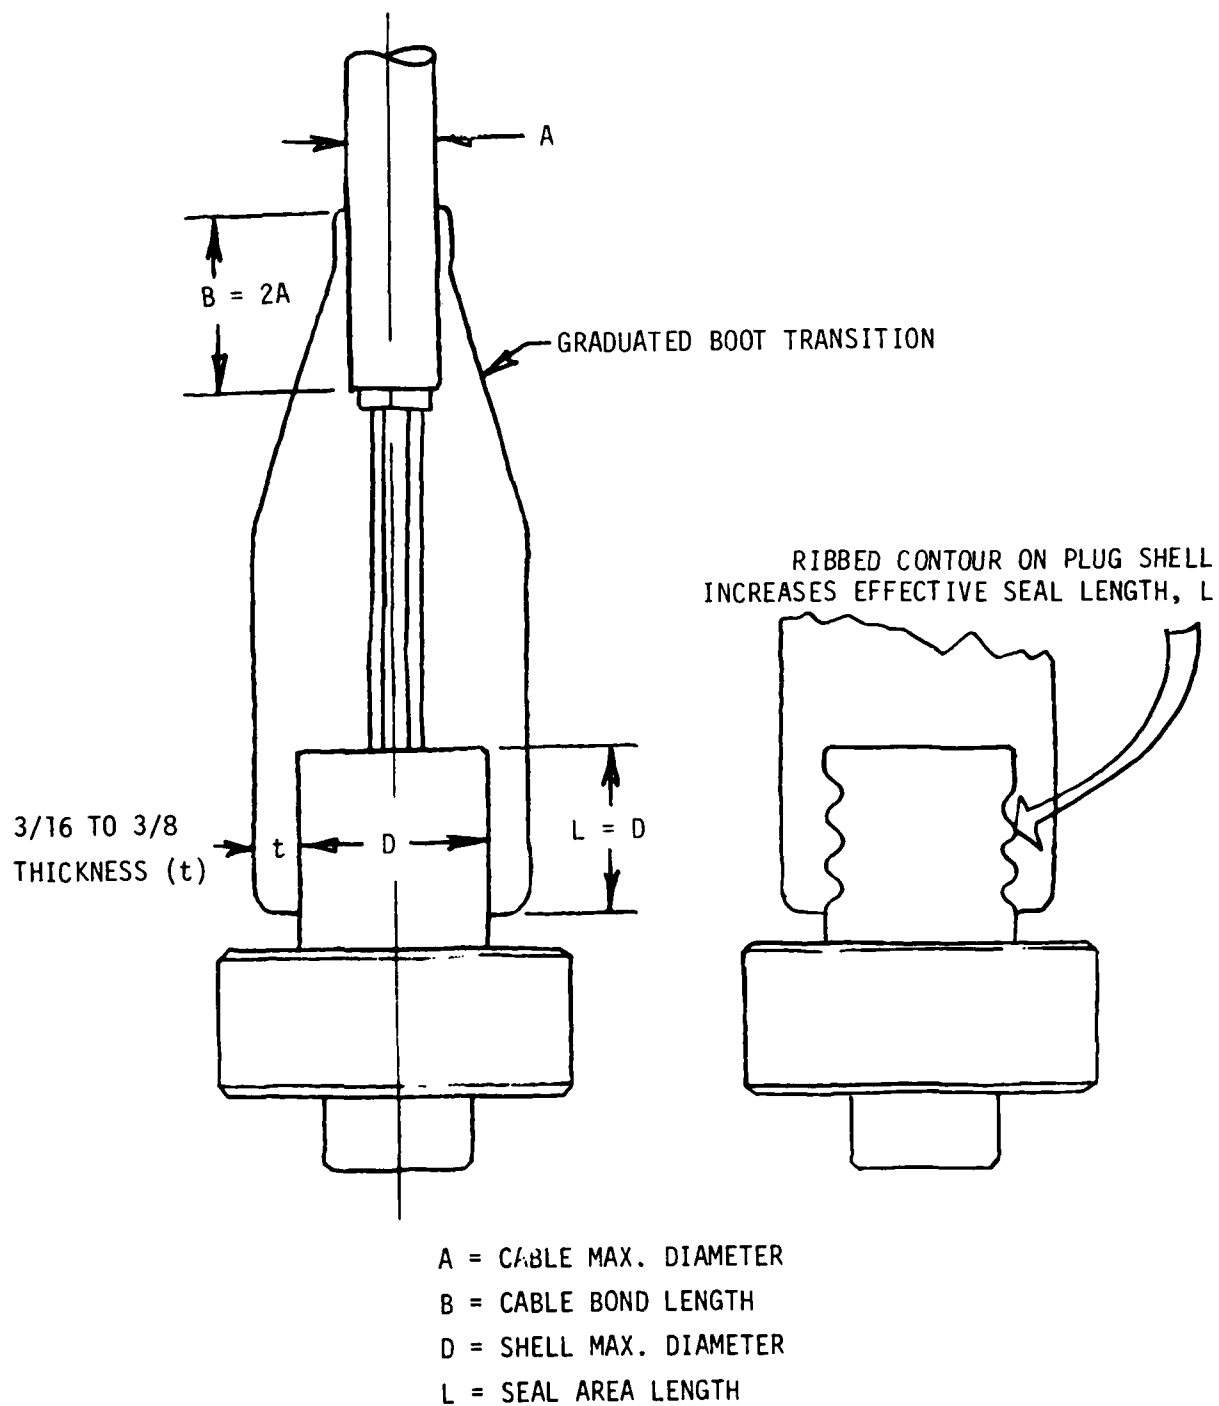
VIEW SHOWING PLUG CABLE BOOT SEAL BOND AREAS
